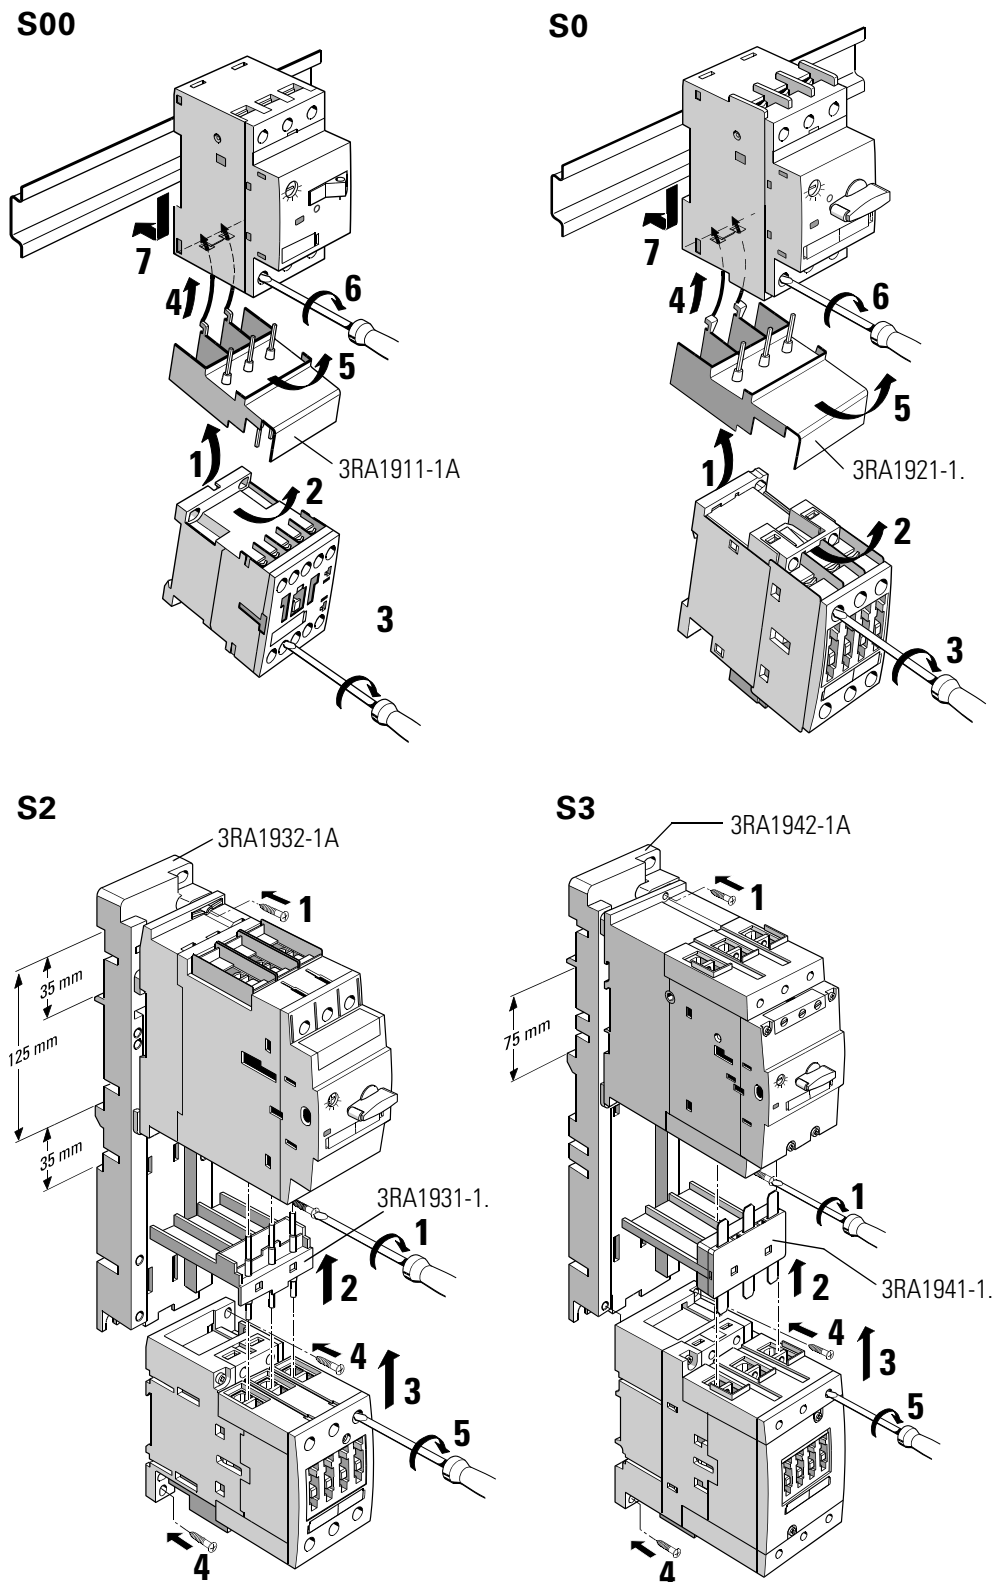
Self-assembly, rail, direct starter (frame sizes S00 to S3)
